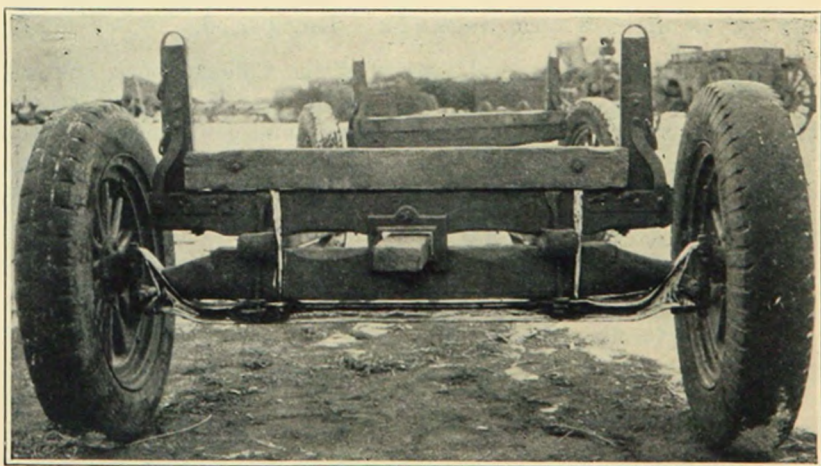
Rear view of completed rear axle. Note two extra U-bolts which fasten wagon gear to automobile axle.
